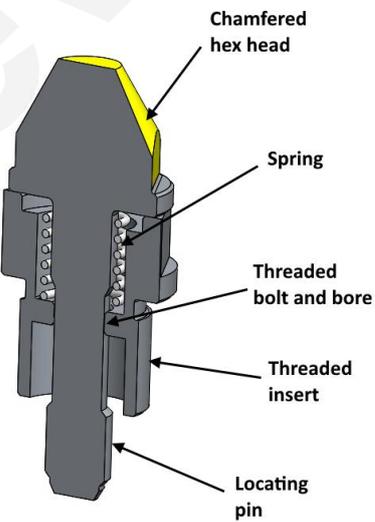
Section view of the spring bolt mechanism. The chamfered hex head allows adjusting of the locating pin from a long distance. The threaded insert fixes the mechanism to a steel baseplate.
